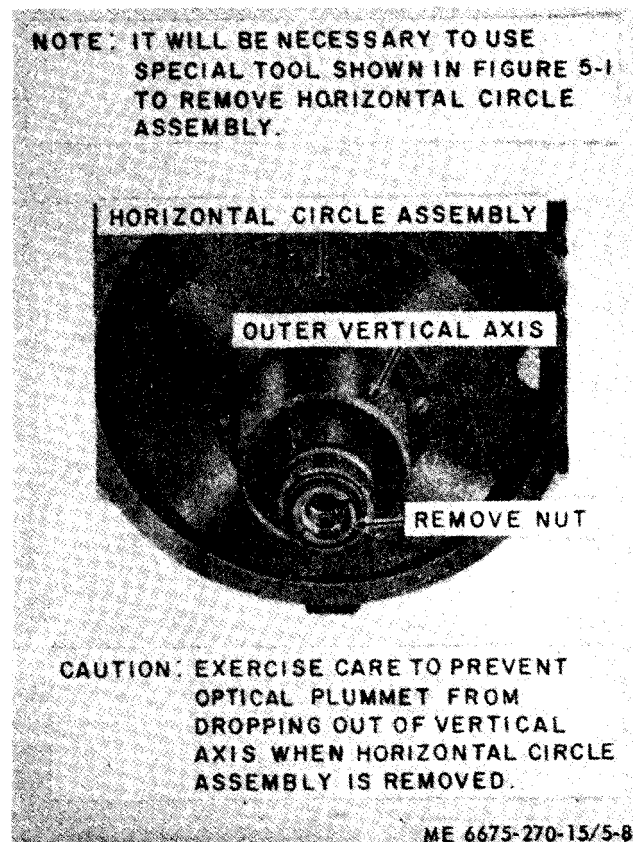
Horizontal circle assembly and outer vertical axis, removal and installation.
